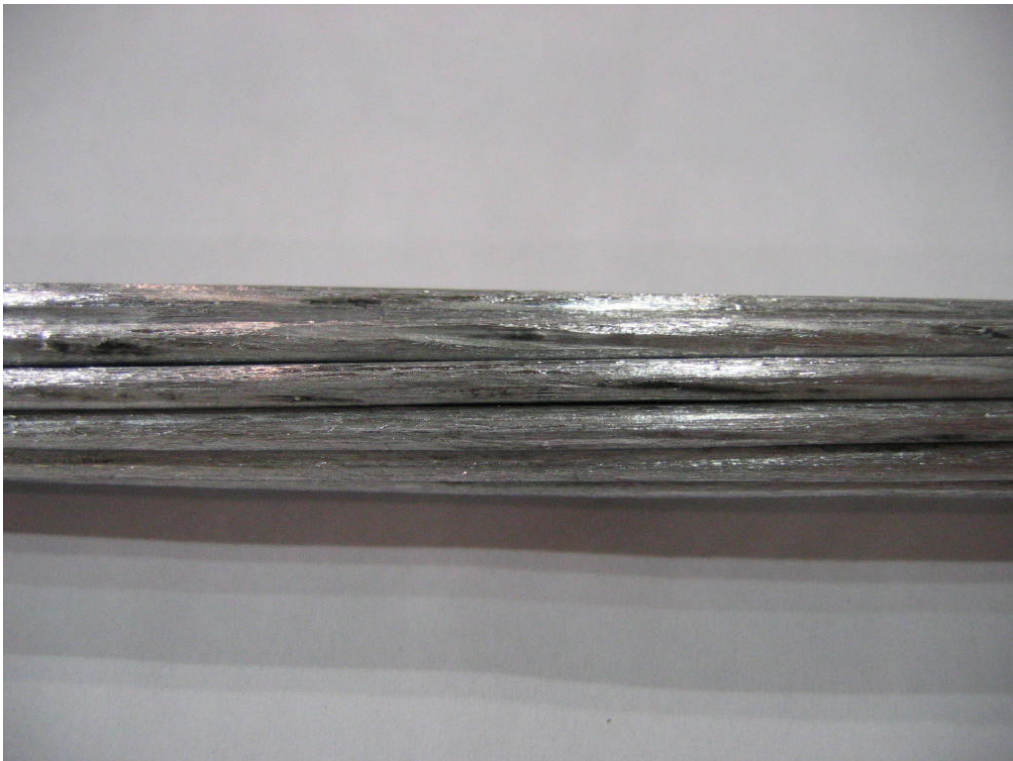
2<sup>nd</sup> Layer Aluminum – inner surface, bottom side
